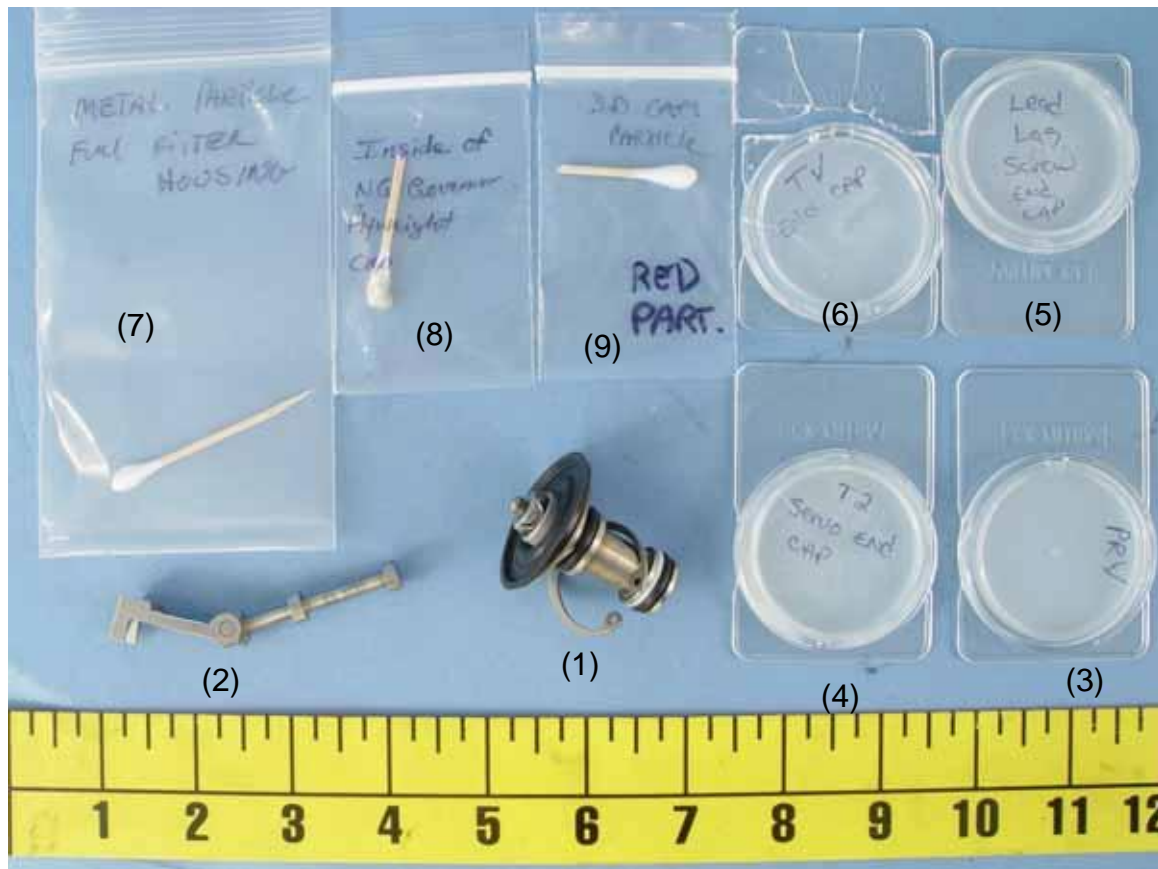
Photograph of the as-received (1) spool and sleeve portion of the pressure relief valve with retaining ring; (2) rod portion of the pilot valve; (3) specimen container with cover labeled "PRV"; (4) specimen container with cover labeled "T2 servo end cap"; (5) specimen container with cover labeled "lead lag screw end cap"; (6) specimen container with cover labeled "TV (throttle valve) end cap"; (7) specimen bag with cotton swab labeled "metal particle fuel filter housing"; (8) specimen bag with cotton swab labeled "inside of NG Governor flyweight cap"; and (9) specimen bag with cotton swab labeled "3D CAM particle" that contained a red particle that was freely moving within the bag. The numbers on this page were randomly selected to facilitate identification of the submitted pieces and do not correspond to sample numbers used later in this report.
